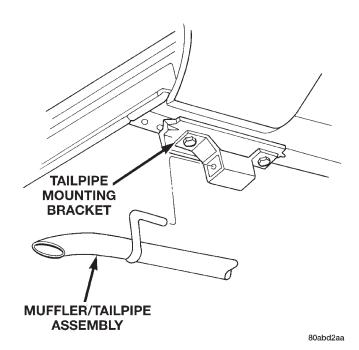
Rear Exhaust Tailpipe Mounting Bracket
